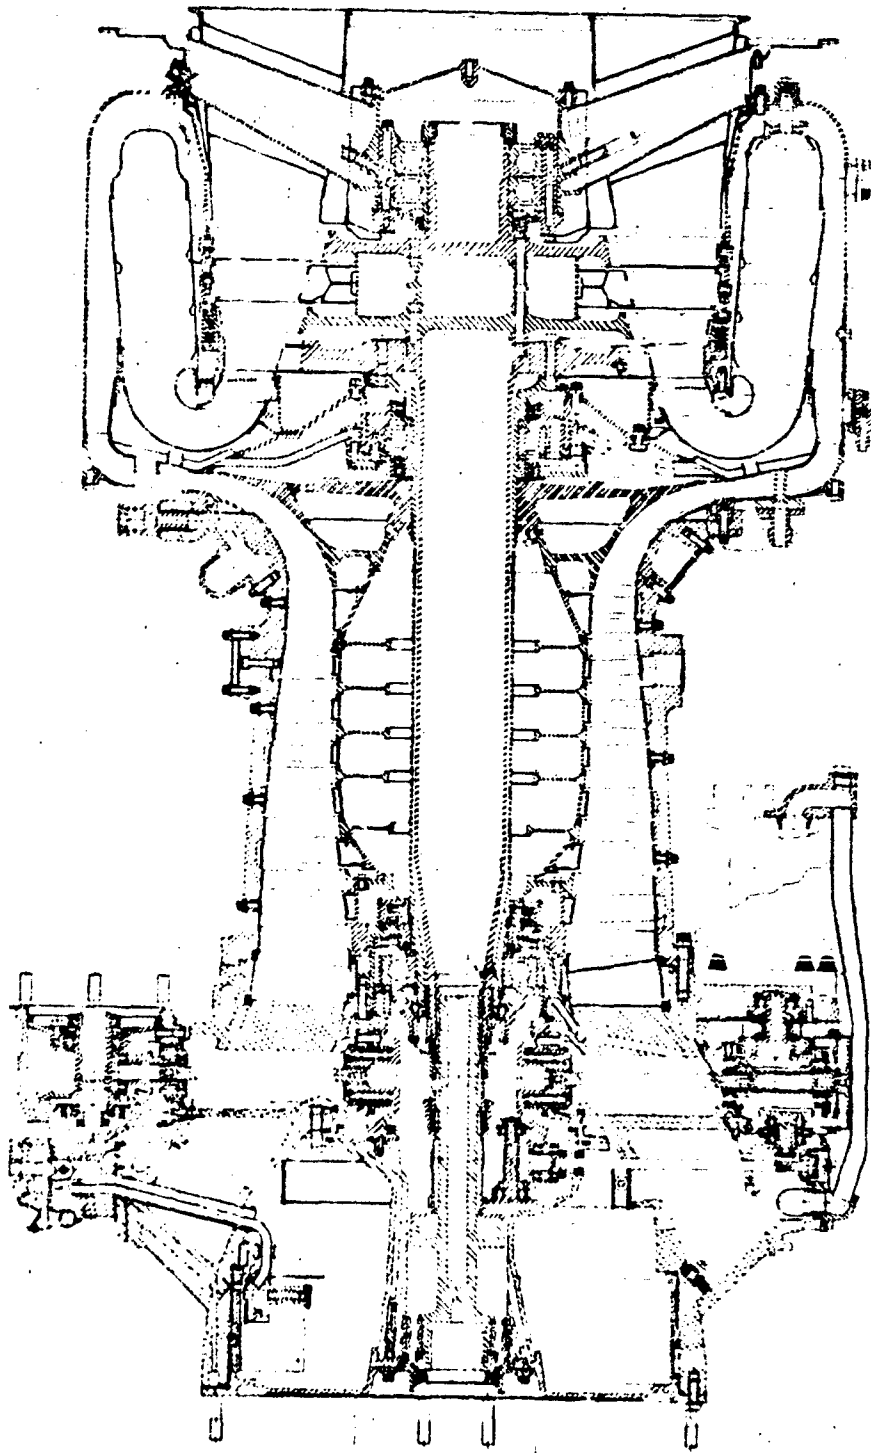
Avco Lycoming T55 Turbine Engine Cutaway.
